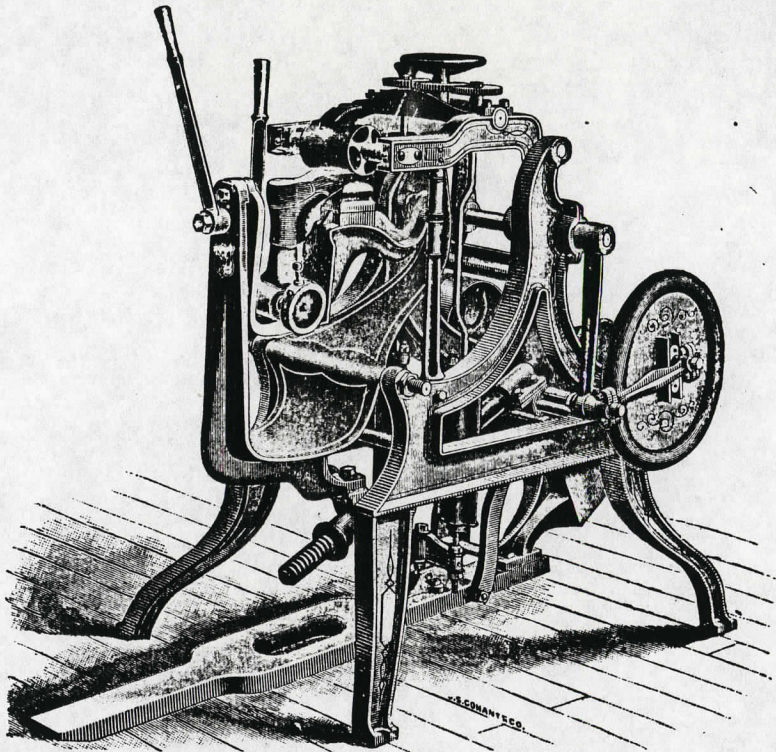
Bresnahan's Beating-Out Machine.
